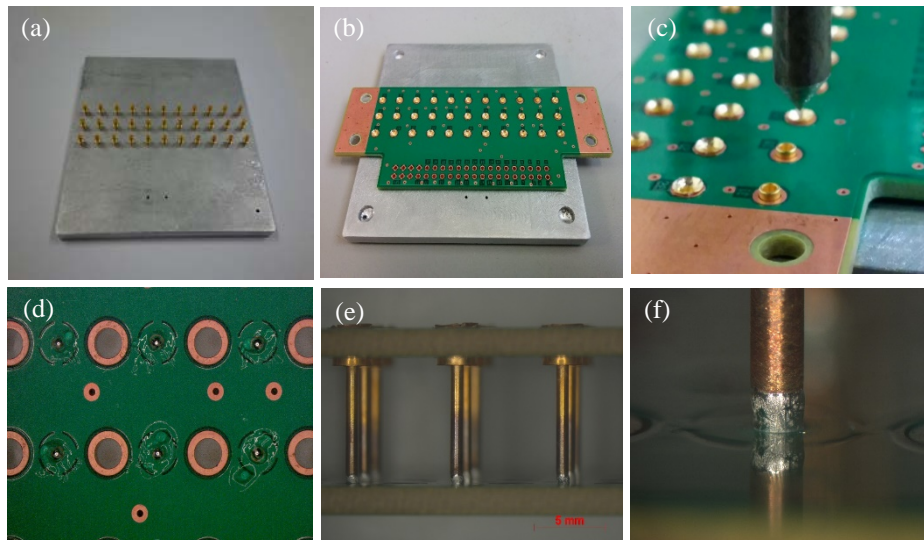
Modified specimen assembly process (a) pin swage fixture (b) board alignment with pins (c) swage procedure (d) solder balls placed in tacky flux (e) specimen post reflow (f) close up of as-reflowed solder joint prior to potting.
